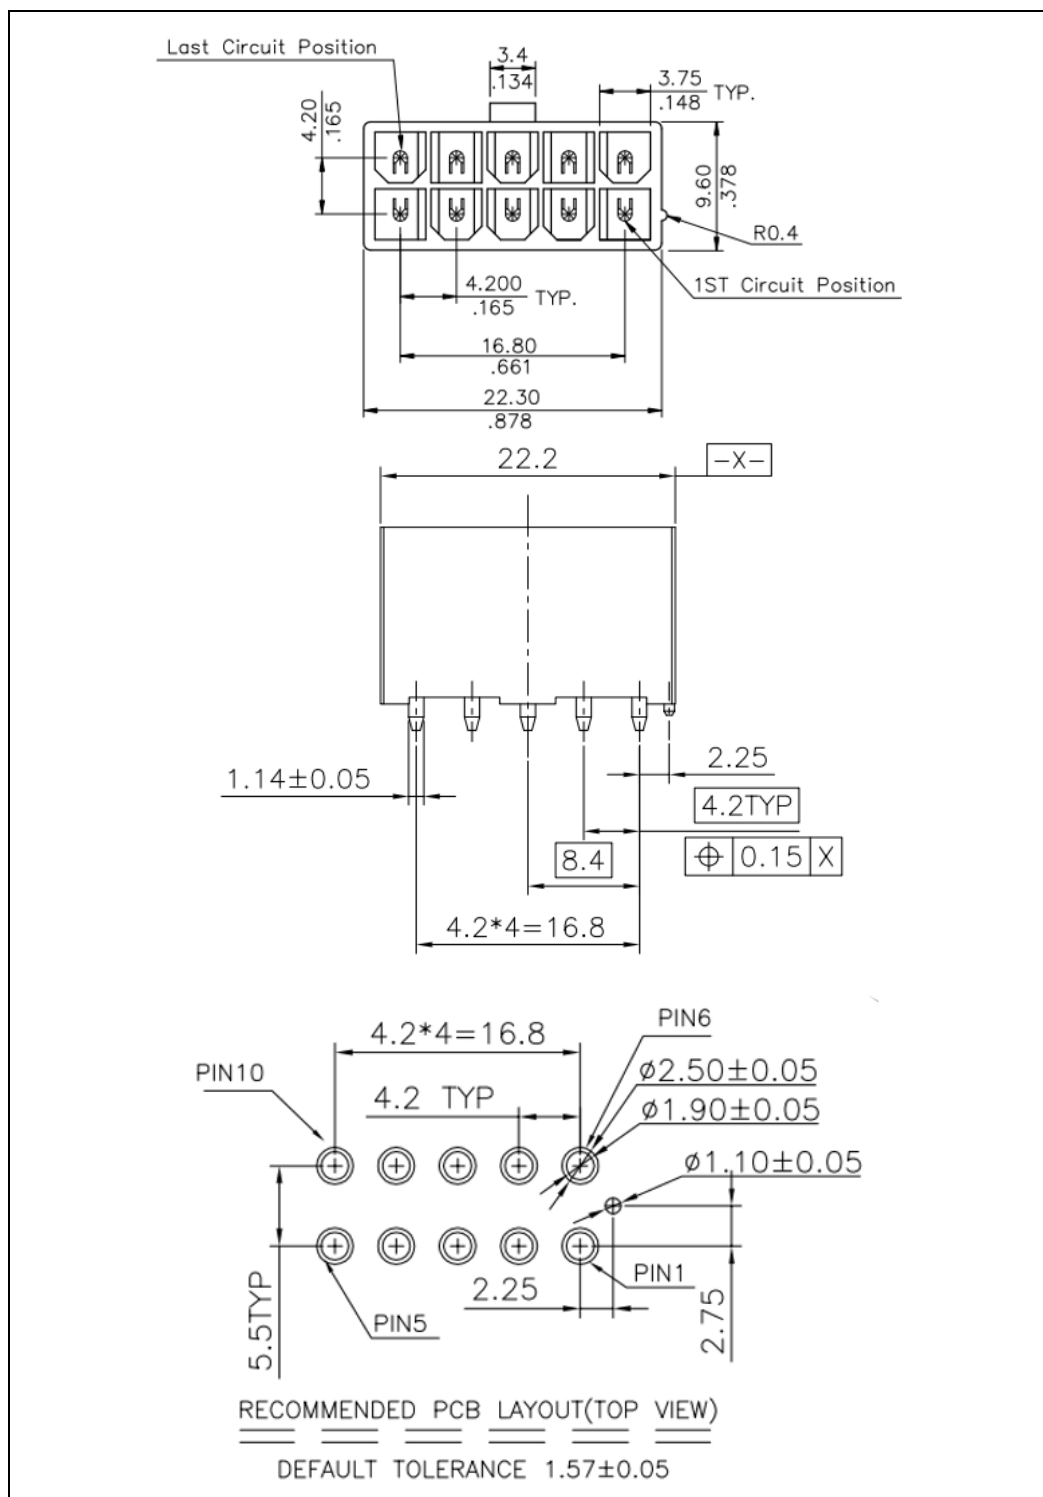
4.2 mm Power Header 10 pin Main Power – Motherboard Connector, PC Board Layout with Dimensions
